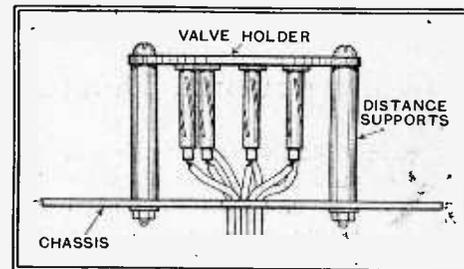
An easy way of mounting a valve-holder on a steel chassis.
